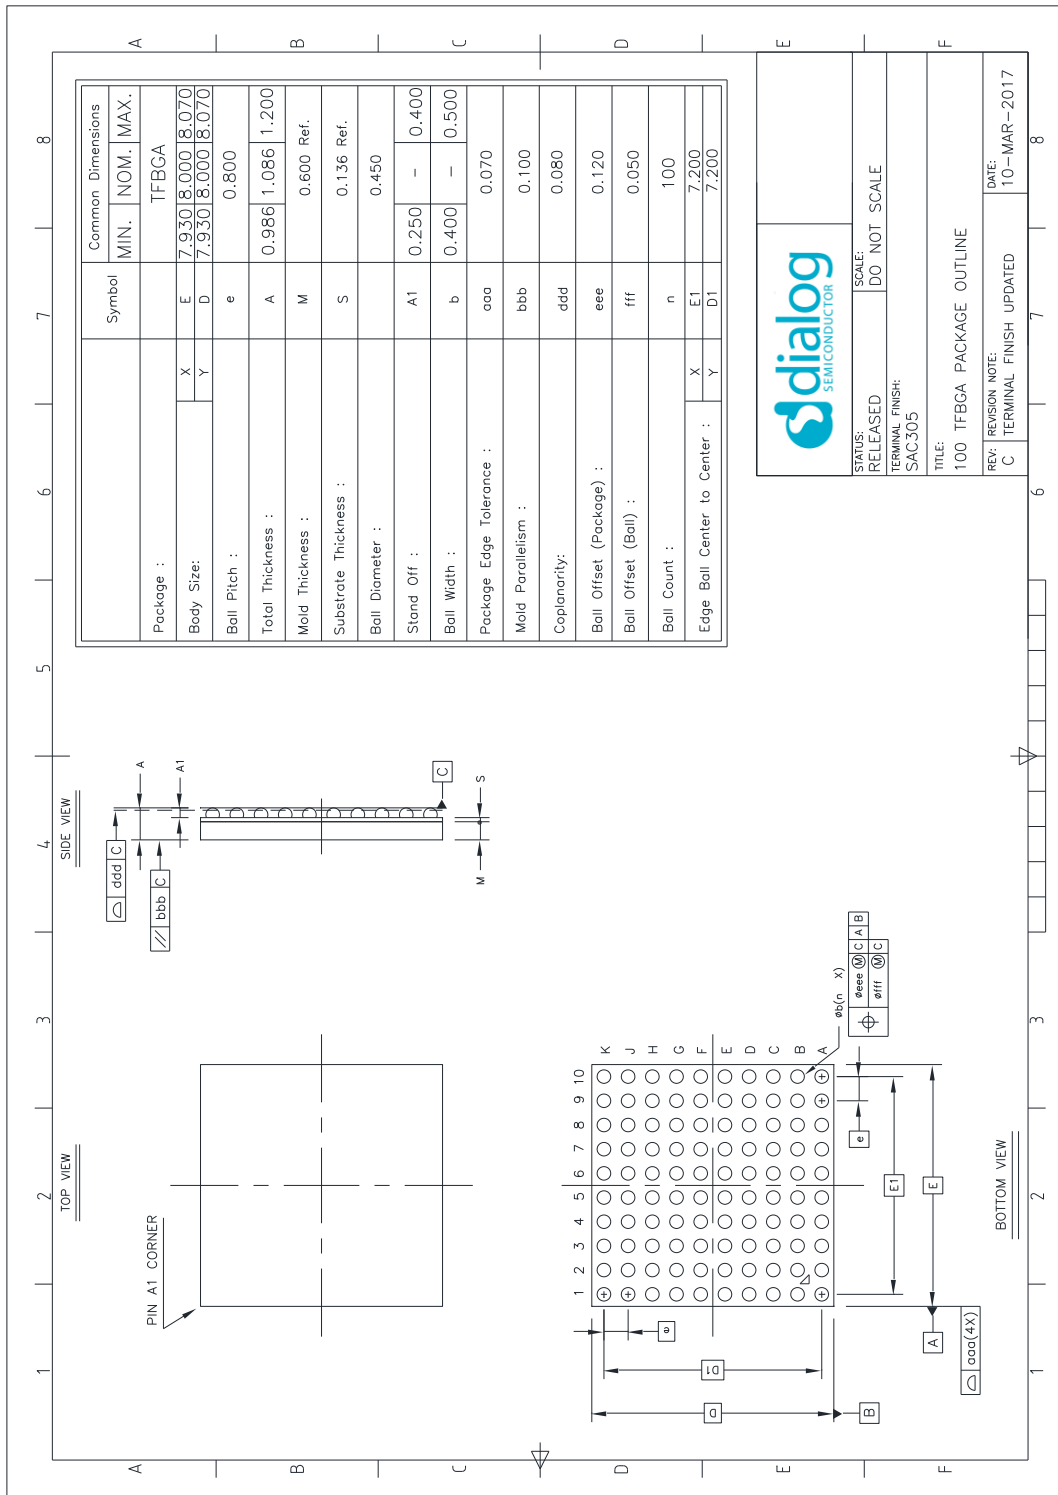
Package Outline Drawing 100 TFBGA 0.45 mm Ball Diameter
